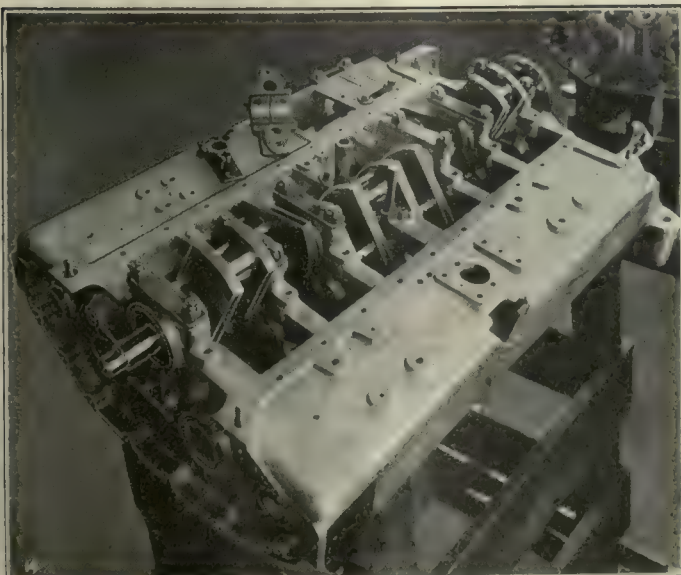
CRANKSHAFT ASSEMBLED IN CRANKCASE. FIG. 15—TESTING END CLEARANCE IN CRANKSHAFT BEARINGS
